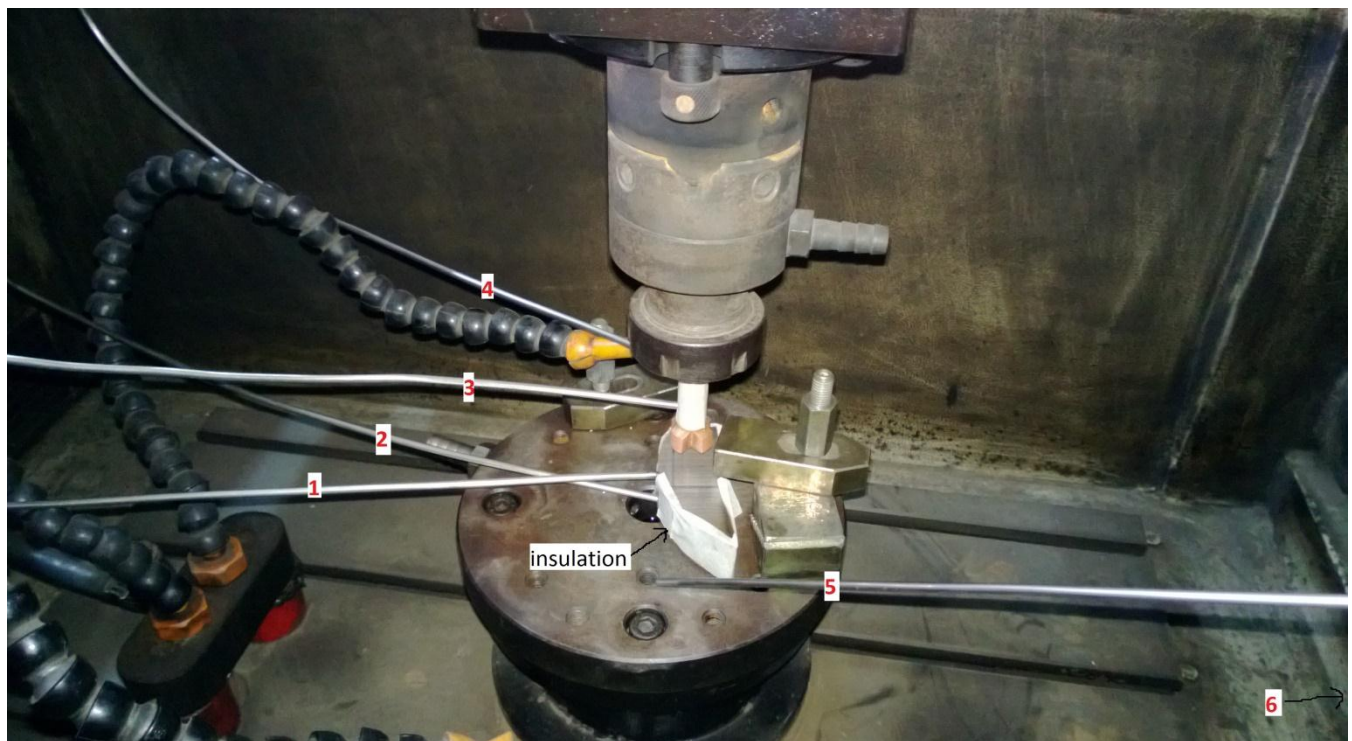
placement of thermocouples on the tool, work pieces (shown with numbering)
